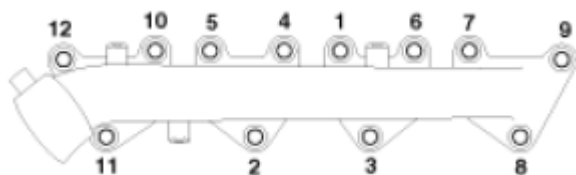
Identifying Exhaust Manifold Nuts Tightening Sequence (RH)
